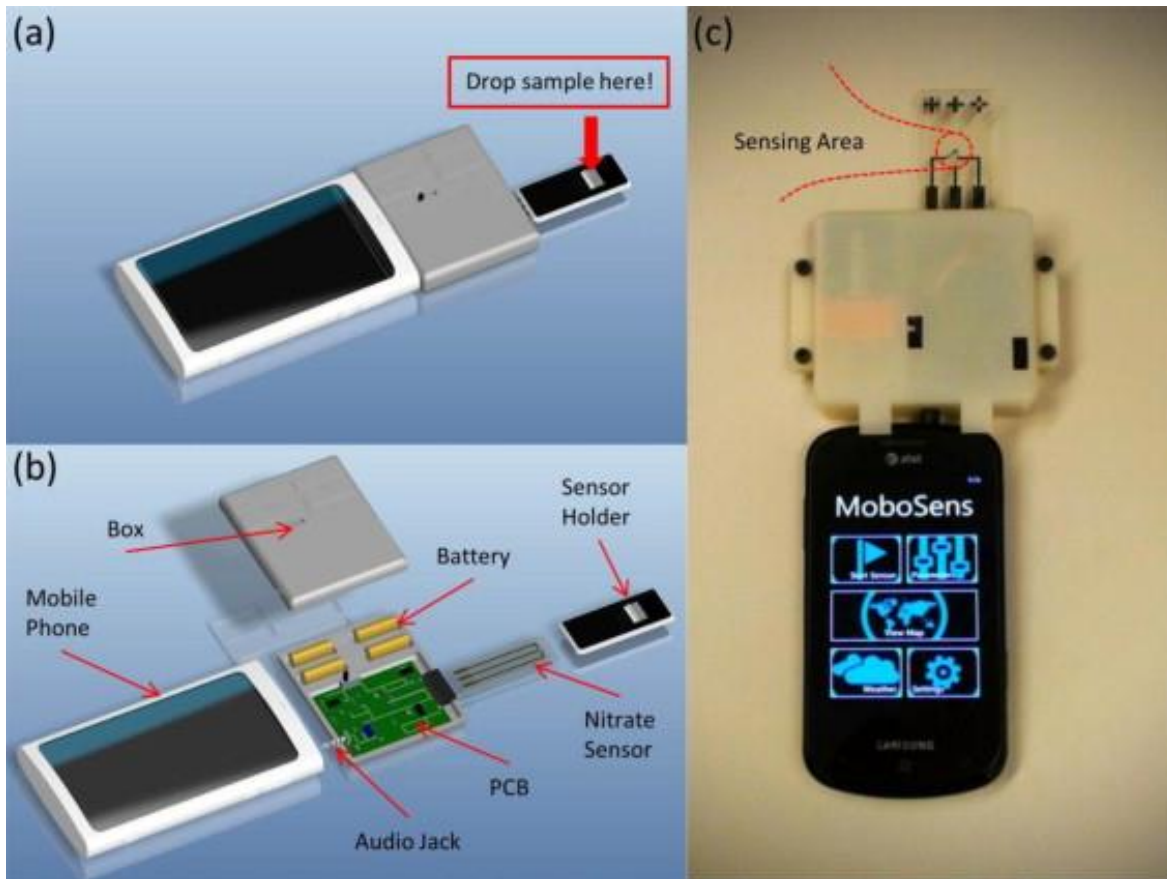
Concept design and real package of MoboSens. (a) Assembly view of MoboSens. (b) Detailed components of MoboSens. (c) Photograph showing the complete MoboSens system.
